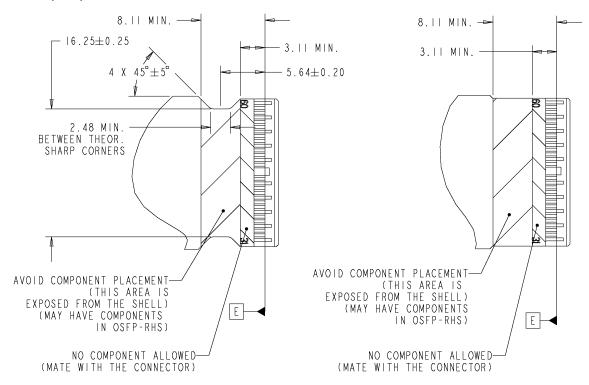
OSFP1600 module pc board chamfer (card-edge)
